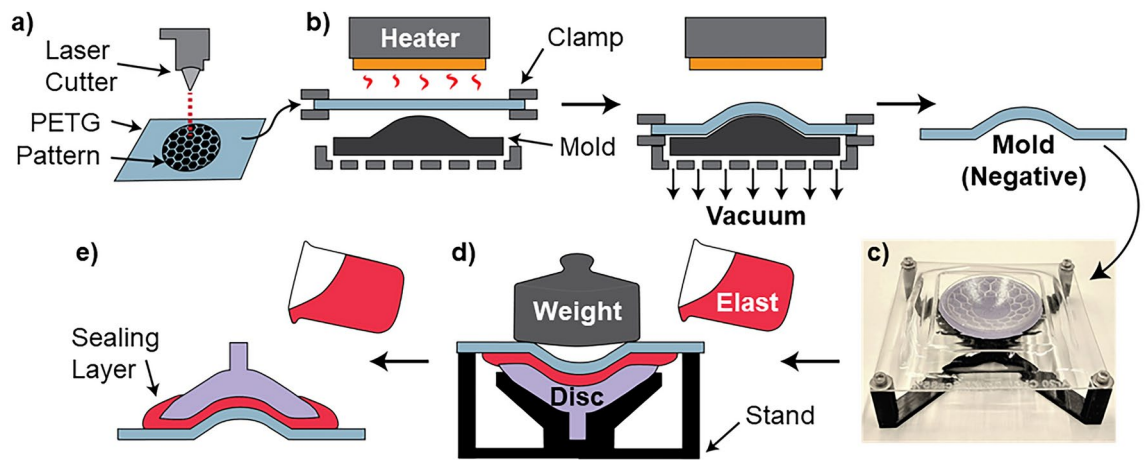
Fabrication process to produce desired surface patterning. (a) The pattern was rastered onto PETG using a laser microengraving machine. (b) A thermoformer heated the rastered PETG sheet, which then transferred onto the mold below, thereby forming to the desired shape when a vacuum was applied. Once cooled, the mold pattern was released. (c) An image of a thermoformed mold and suction disc (purple) in a stamping setup. Cup diameter was 60 mm. (d) Schematic of the elastomeric stamping process. Uncured elastomer was added to the chamber of a suction disc (supported by a stand). The thermoformed mold was fixed to the top and loaded with a weight. (e) A final sealing layer of uncured elastomer was applied to the back of the disc.
